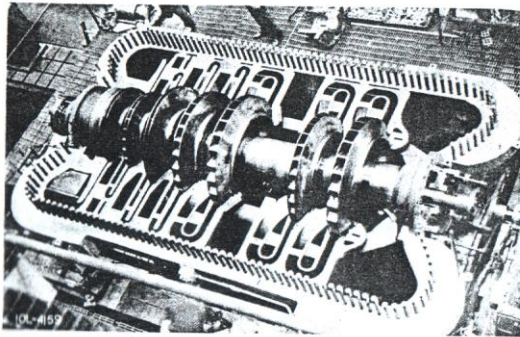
A centrifugal compressor rotor assembly set in the bottom half of a compressor casing. Photo courtesy of Elliott Company, Jeannette, PA.
